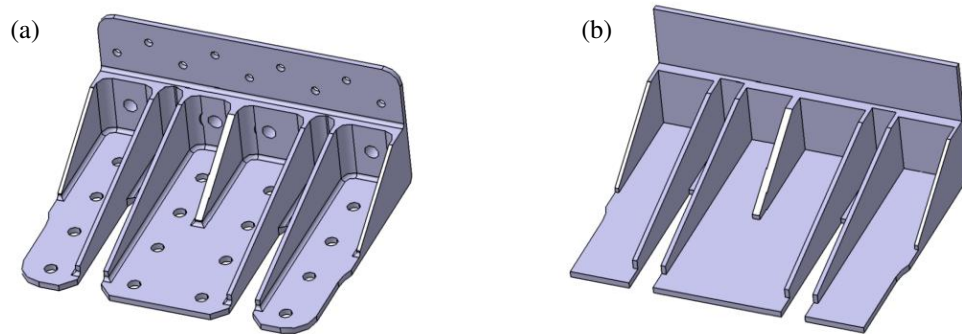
Illustration of CAD defeaturing using CATIA: (a) CAD initial model, (b) Simplified CAD model with holes, fillets and chamfers suppressions.
